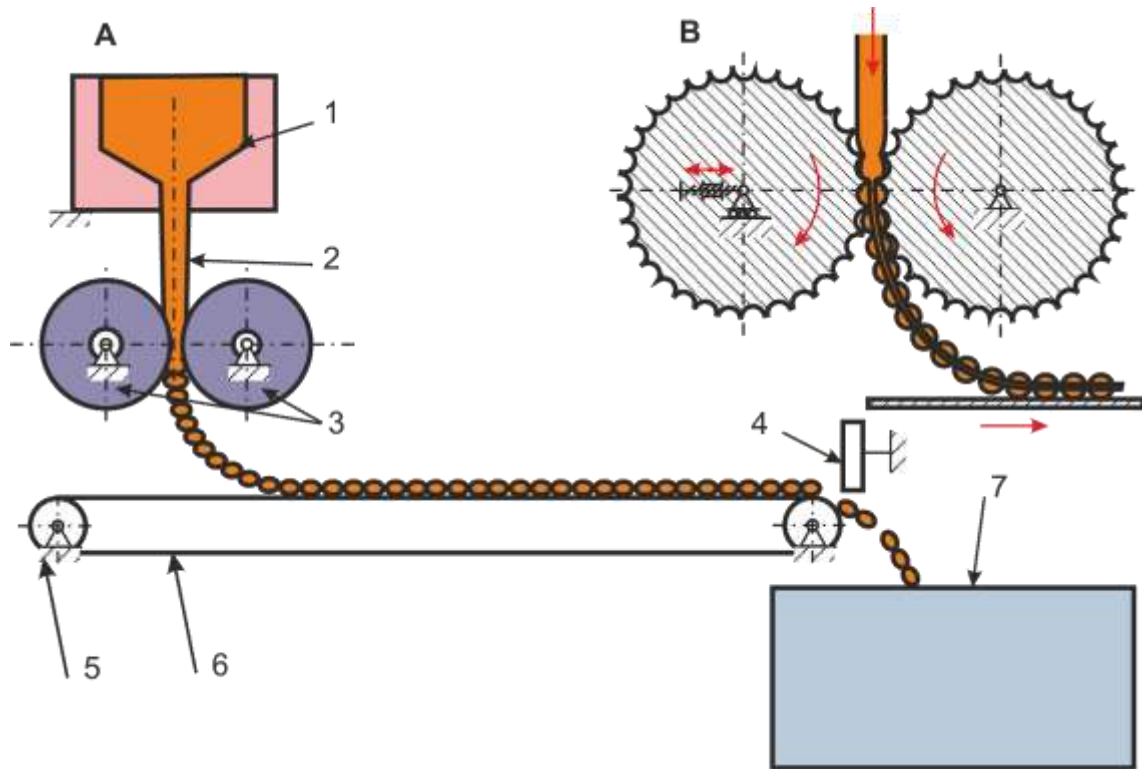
Function of the rotary squeezer press: A - scheme and principle, B - section through rotary moulds, 1 - source of glass melt, 2 - stream of glass melt, 3 - rotary moulds, 4 - breaker, 5 - machine frame, 6 - transport belt of the presser, 7 - thermal box
